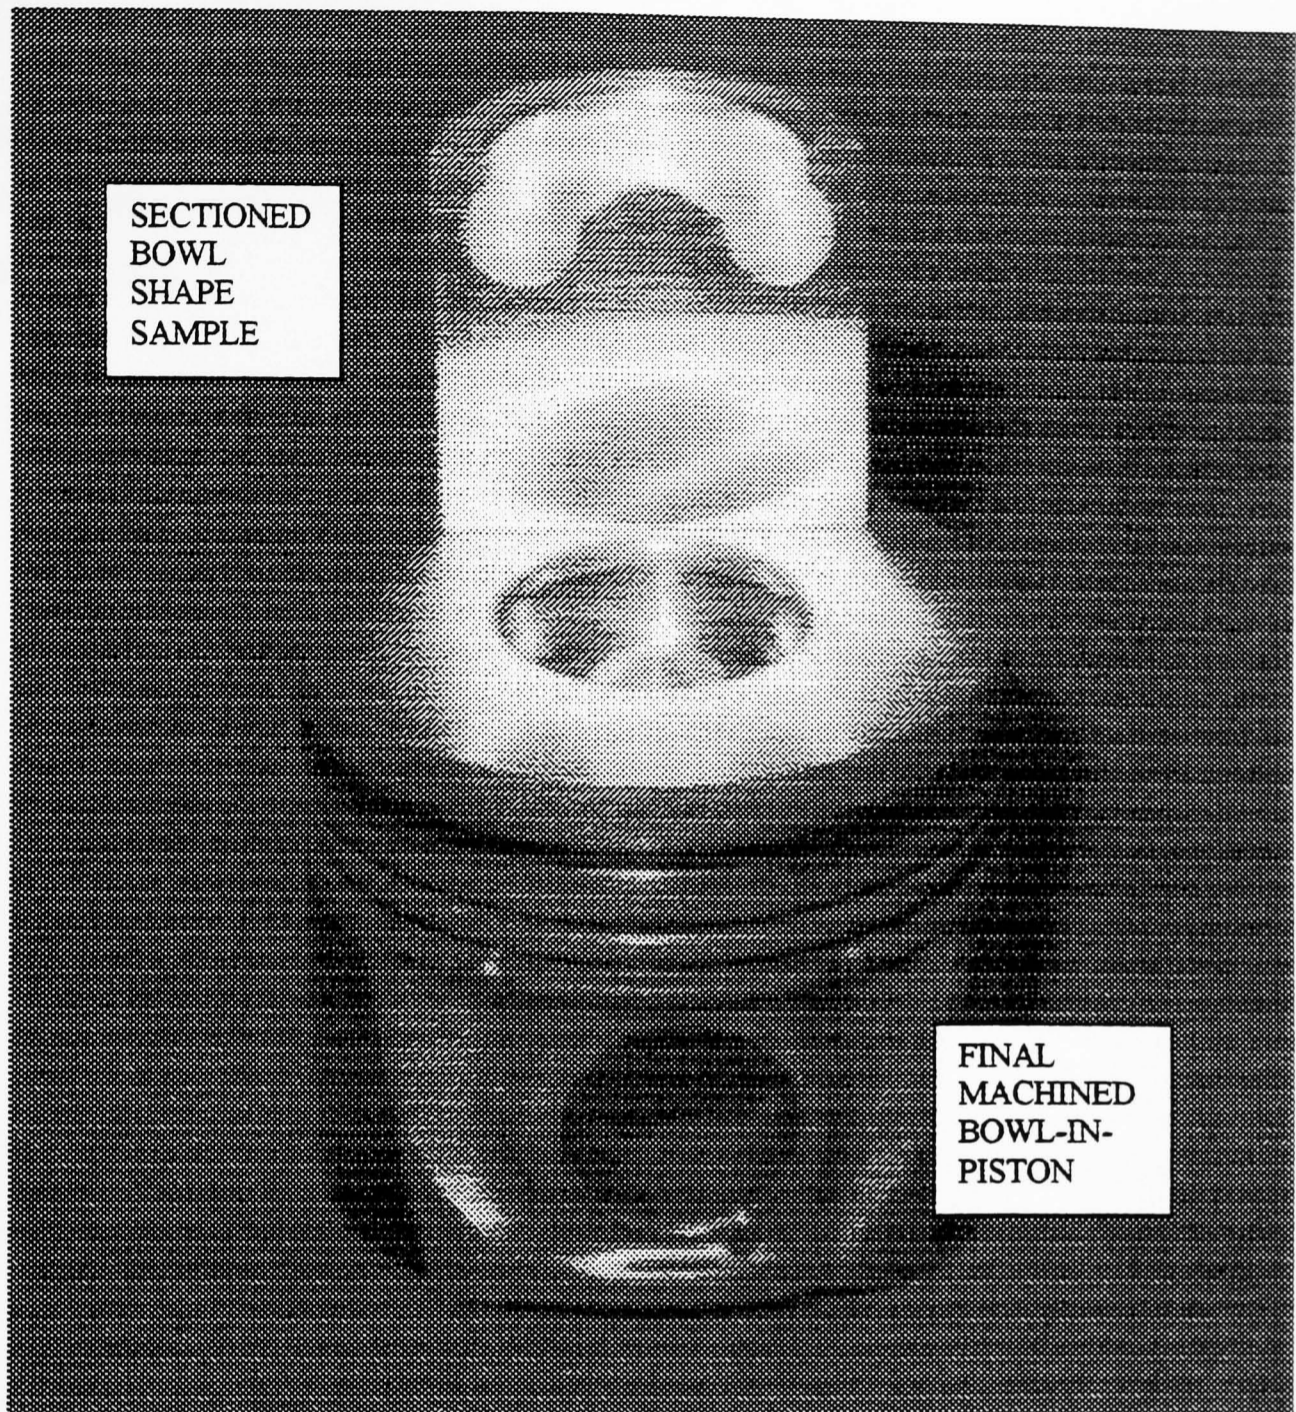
Photograph of a sectioned test sample of piston bowl shape ONE , placed on top of the final machined piston.
